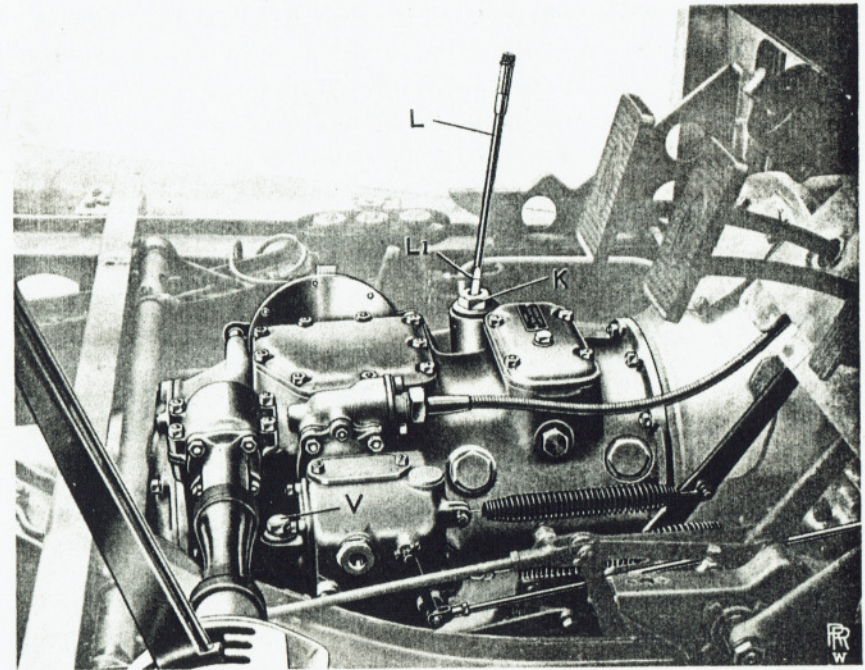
GEARBOX AND CASING OF DAMPER GOVERNOR.
